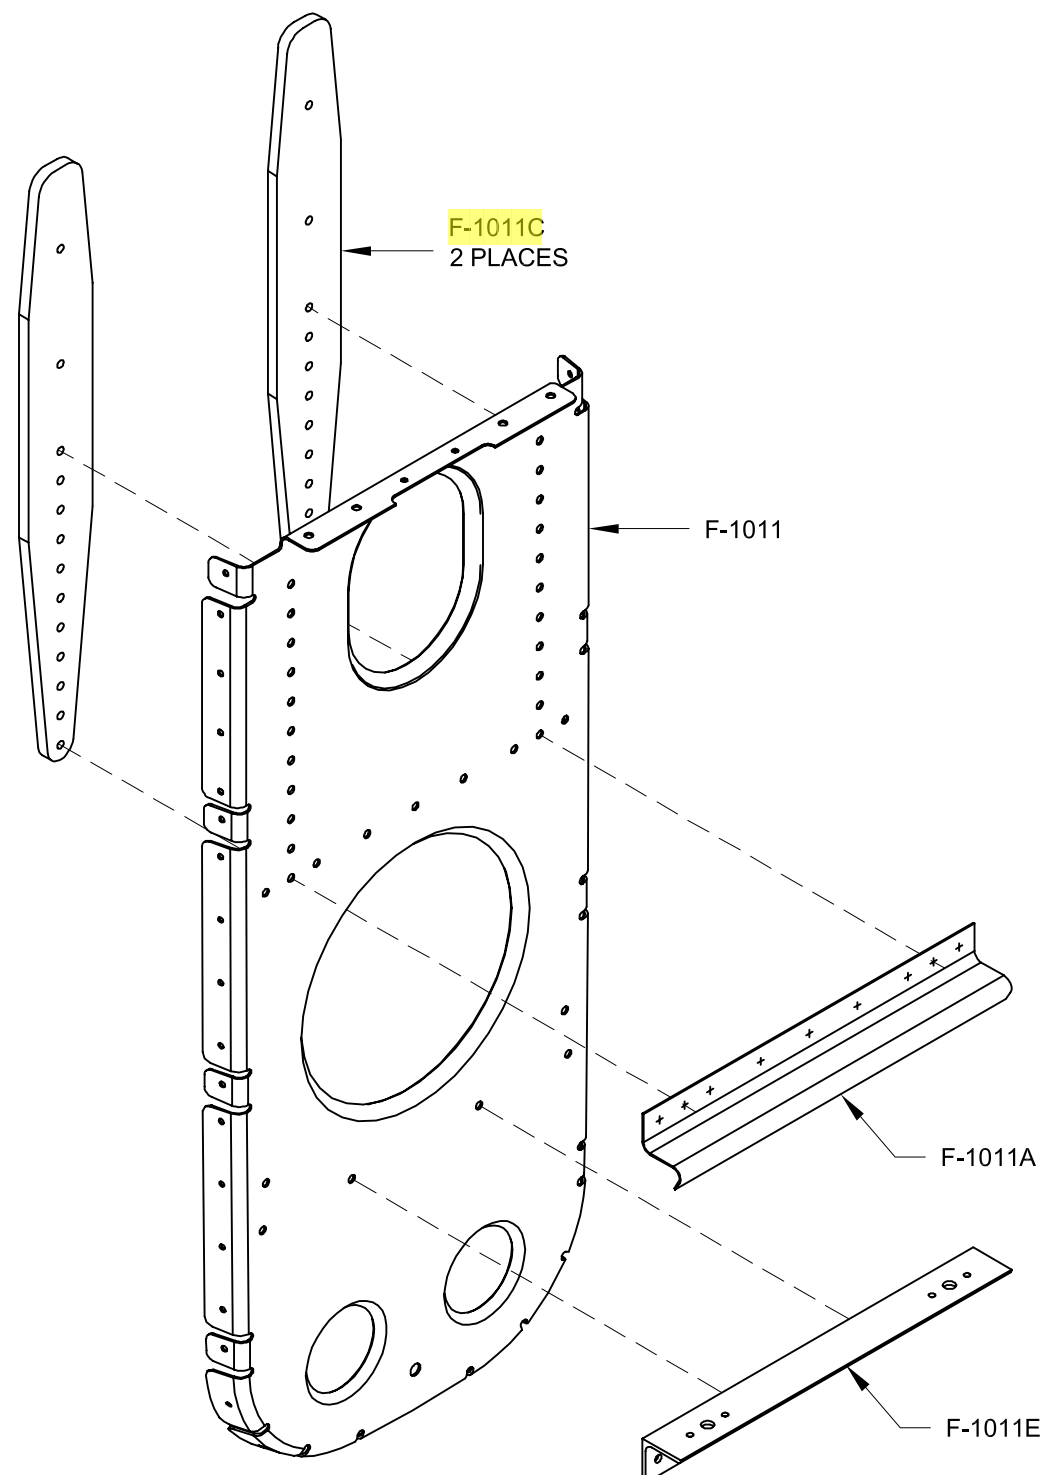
POSITIONING F-1011 BULKHEAD PARTS
